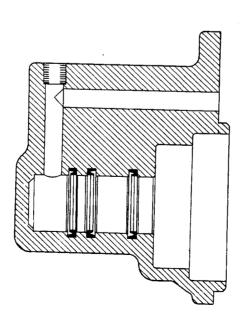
Seals Installed in Oil Collector (T-72356)
